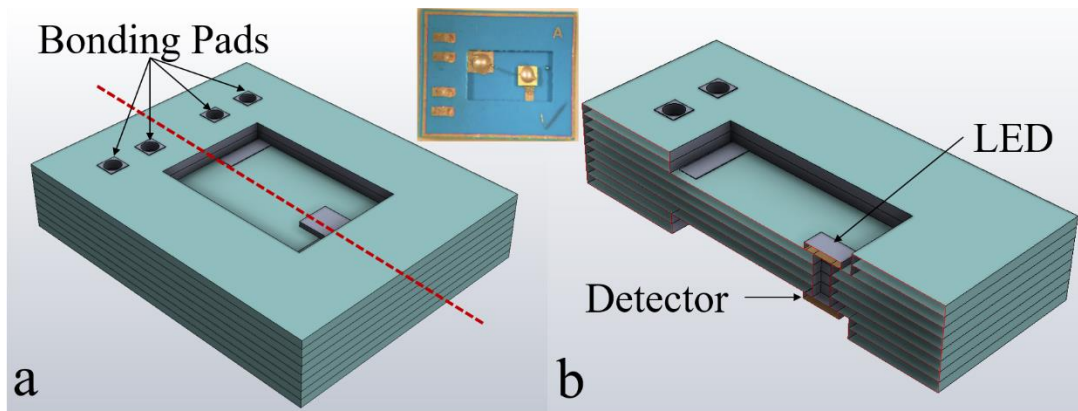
a) 3D CAD design of the LTCC based optocoupler, b) cross sectional view. Inset shows the fabricated device.
